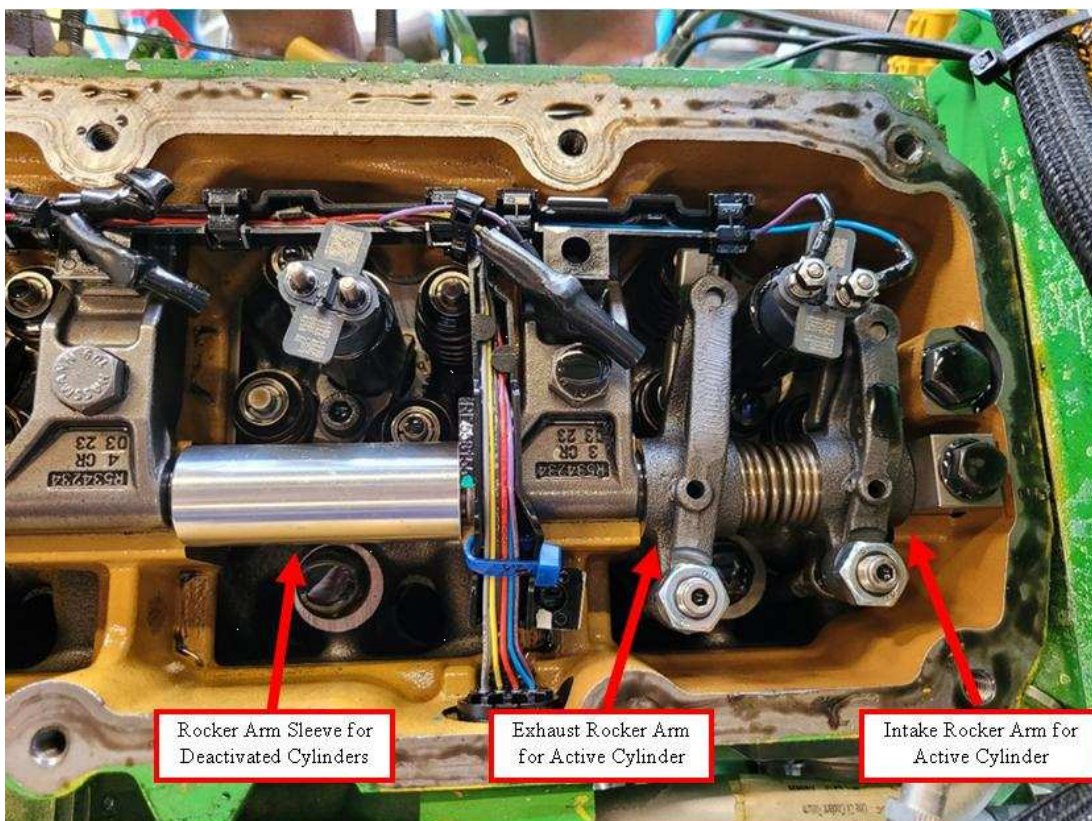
Valvetrain configuration with rocker arm spacers for cylinders #2-#6.
